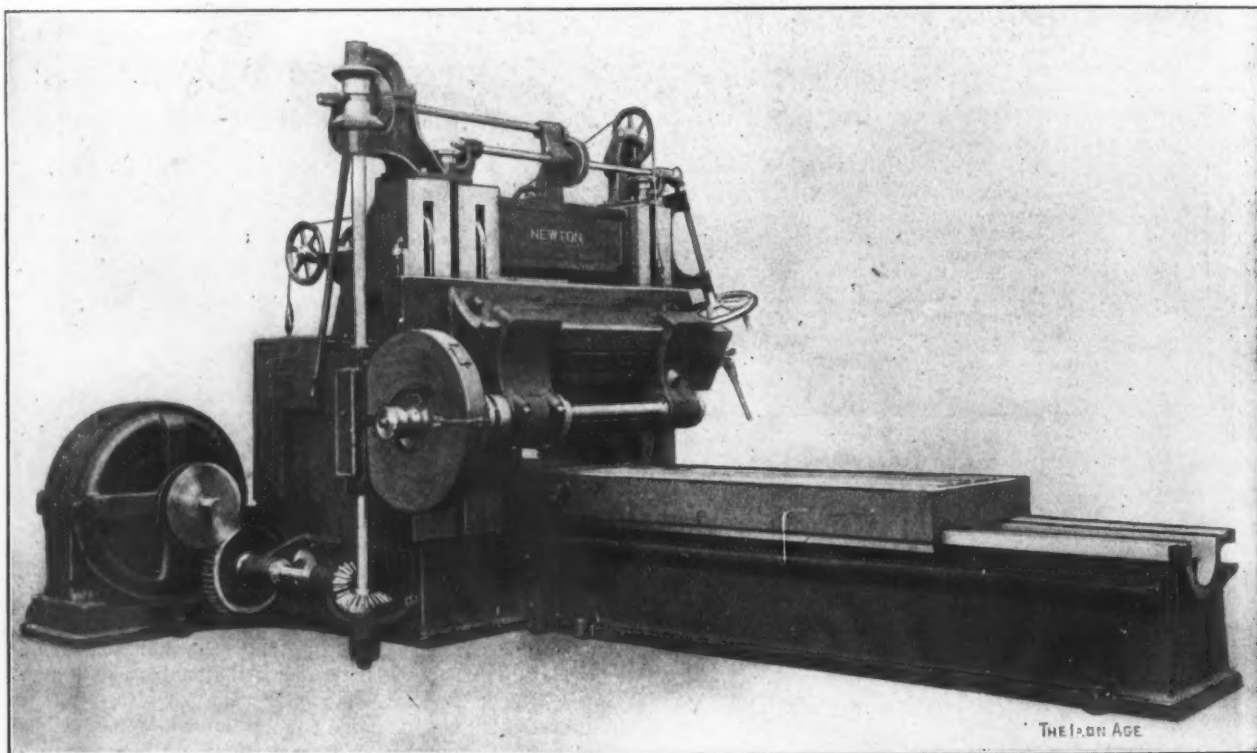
The New Extra Heavy Slab Milling Machine Built by the Newton Machine Tool Works, Philadelphia, Pa.
